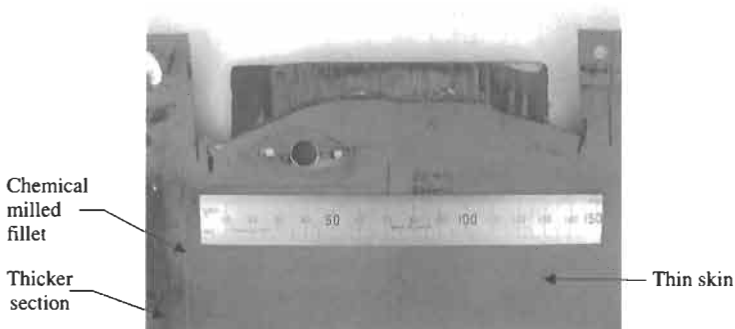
Interior view of cracked panel with boron/epoxy repair [8].
